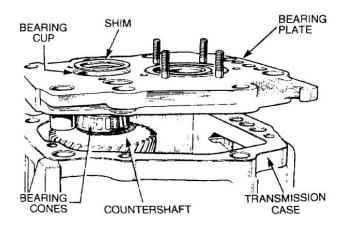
Adjustment of the Countershaft Bearing Pre-load
